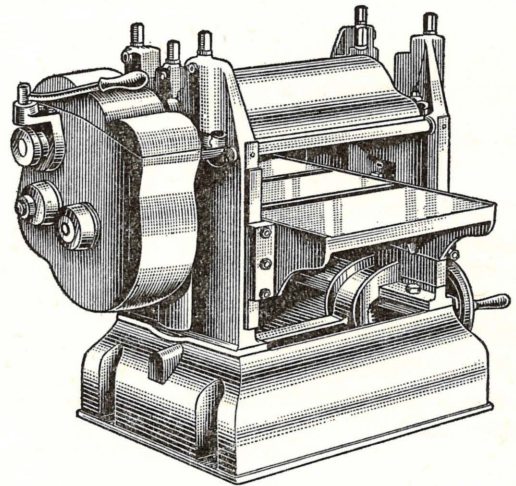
The home workshop planer will take stock up to 4 inches by 12 inches
